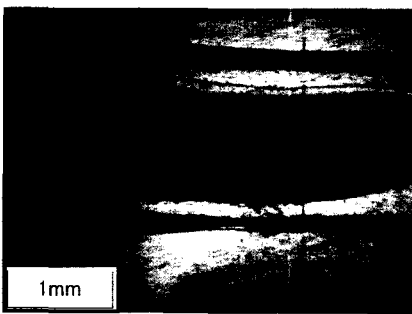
Weld cross section for Experiment 3-2(S)
